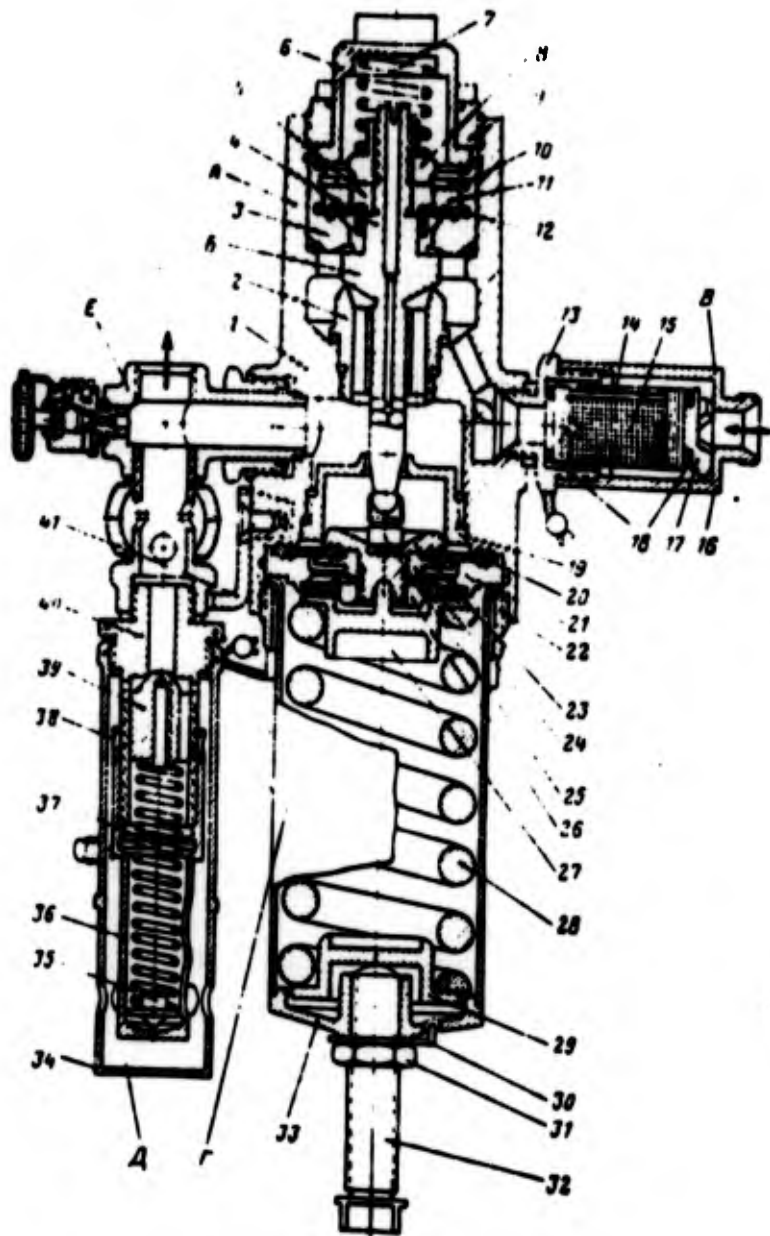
Pressure reducer: A - body; B - valve; B - filter; Г - low-pressure chamber; Д - safety valve; E - flow cock; 1 - casing; 2 - valve seat; 3 - casing of membrane; 4 - valve; 5 - unloading washer; 6 - jacket; 7 - spring; 8, 9 - nuts; 10 - locking ring; 11 - thrust ring; 12 - membrane; 13 - pipe connection; 14 - frame; 15 - grid; 16 - casing of filter; 17 - plate; 18 - packing; 19 - guide bushing; 20 - membrane; 21 - casing of membrane; 22 - nut; 23 - thrust bearing; 24 - washer; 25 - compensator; 26 - nut; 27 - plate; 28 - spring; 29 - plate; 30 - lock washer; 31 - nut; 32 - regulating screw; 33 - housing; 34 - jacket; 35 - thrust bearing; 36 - regulating jacket; 37 - spring; 38 - nut; 39 - valve; 40 - casing of valve; 41 - collar.
